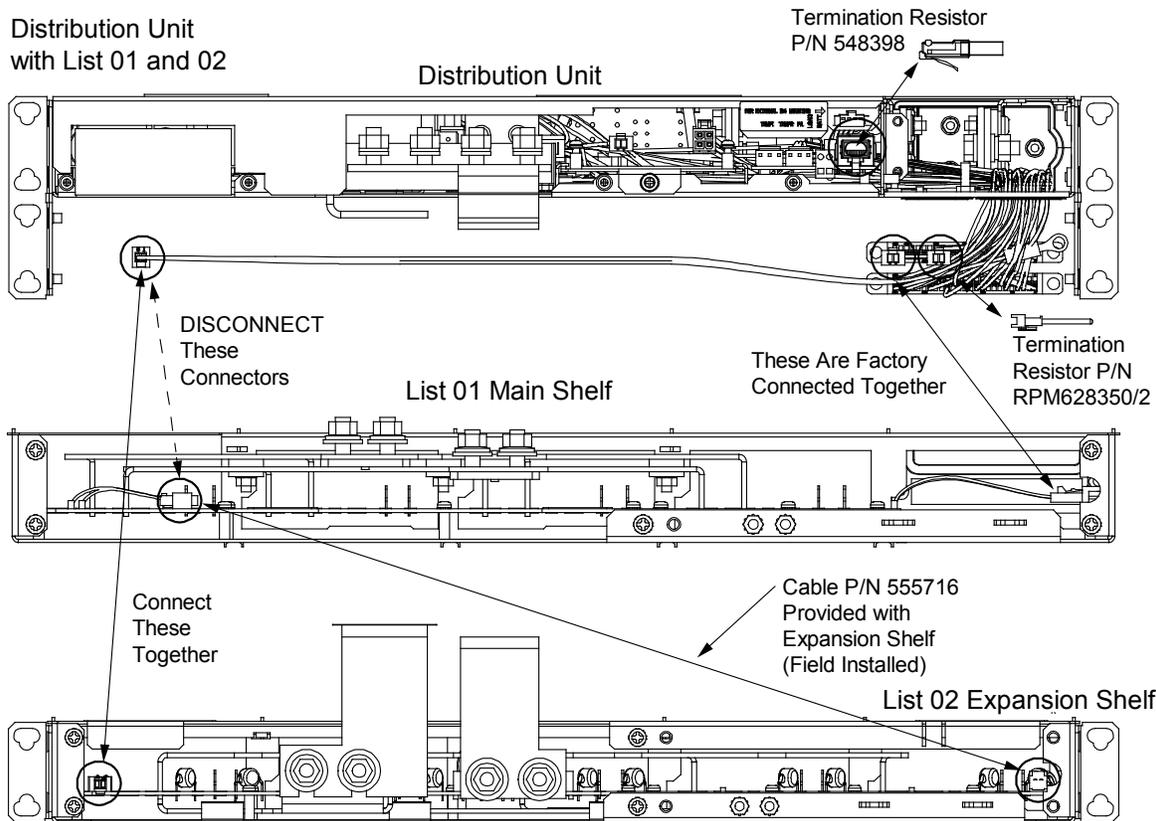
Installing a Field Expansion Rectifier Shelf - Controller CAN Bus
